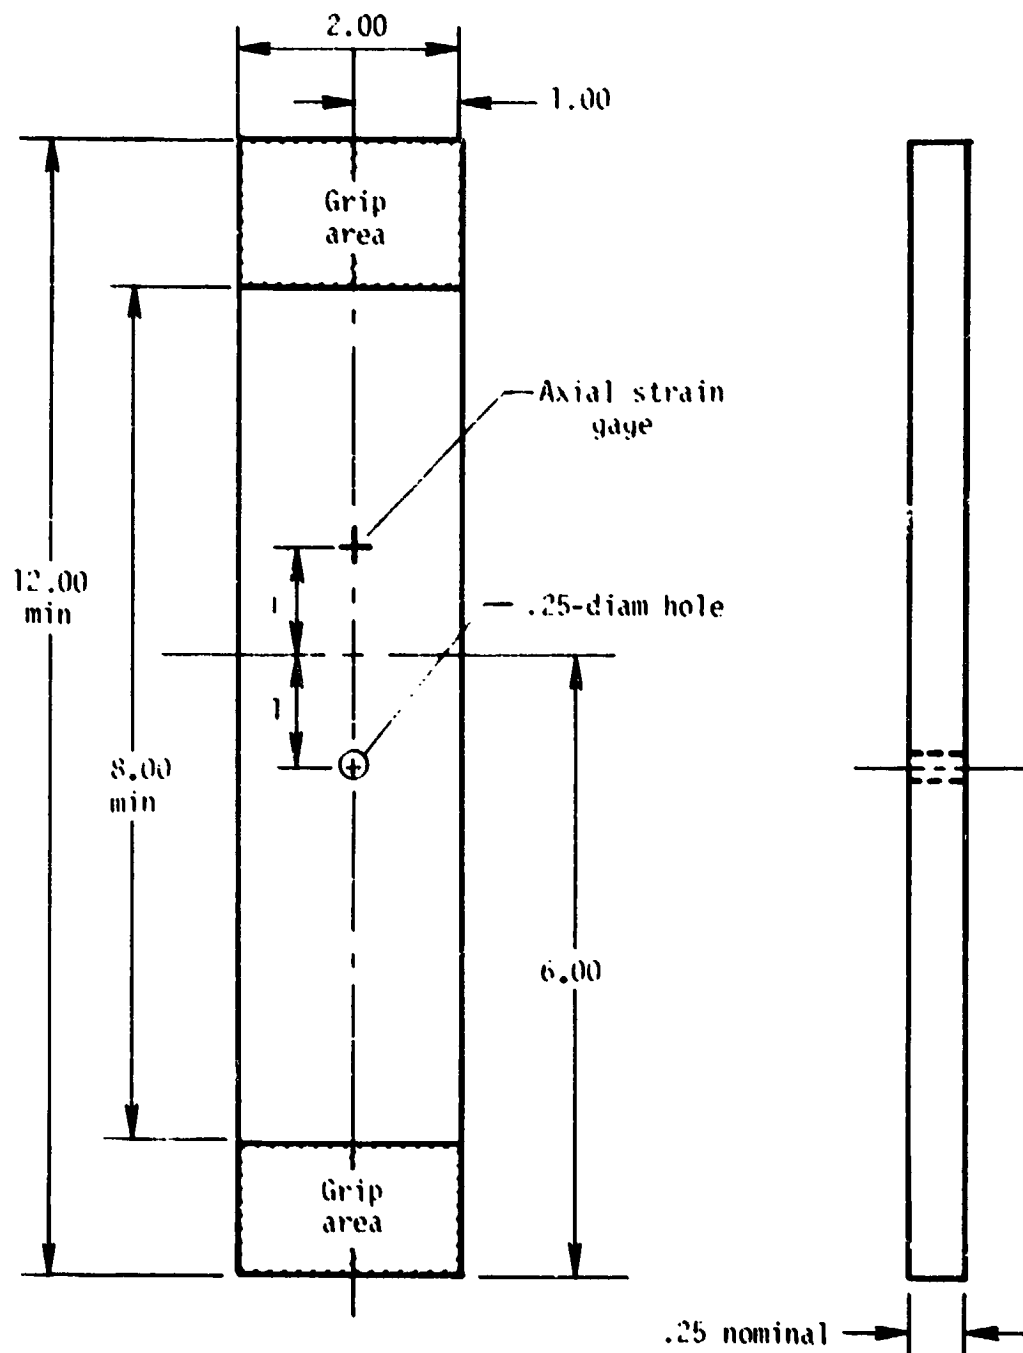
Open-hole tension test specimen. Dimensions are in inches.
